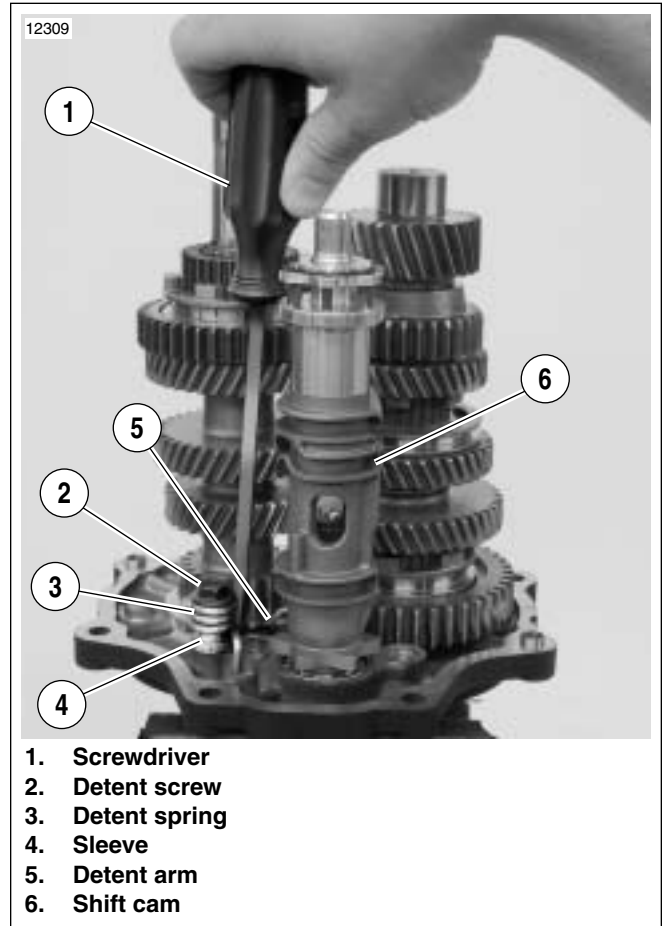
Transmission Gear Assembly with Shift Forks and Shift Cam
